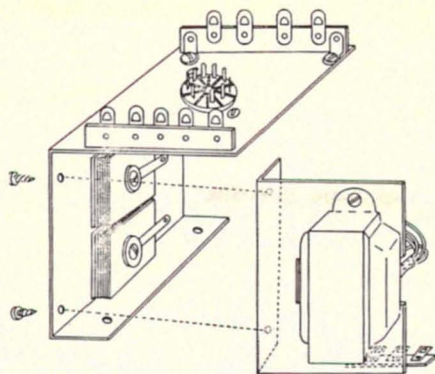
Layout for two chassis plates and main parts. Two selenium units may replace single silicon diode of Fig. 1.
